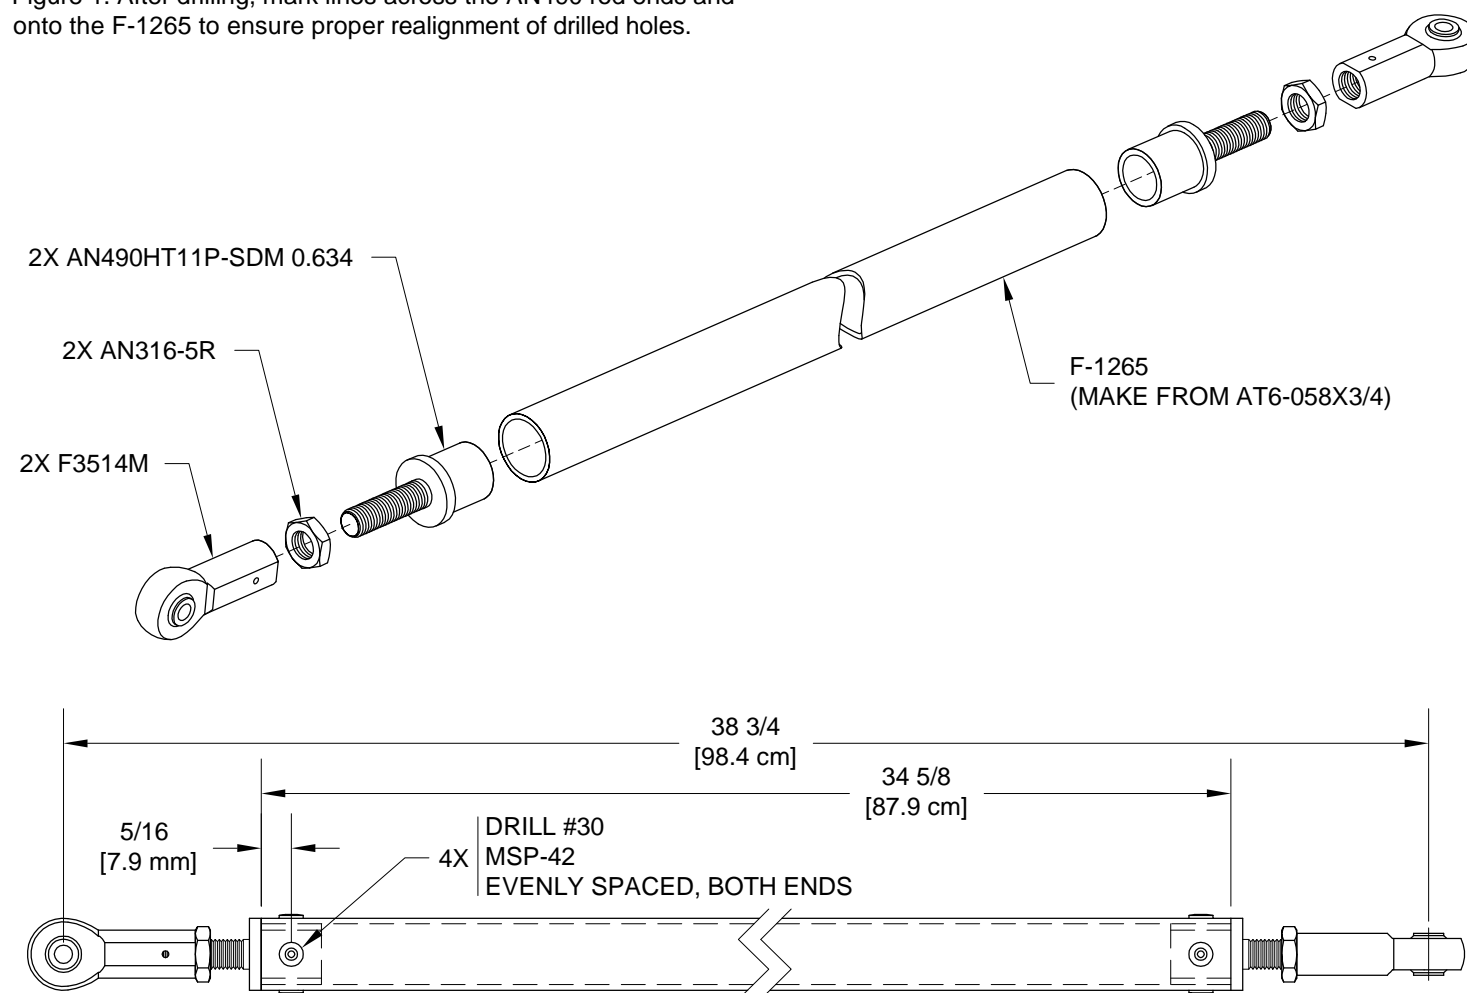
FLAPERON PUSHROD ASSEMBLY
